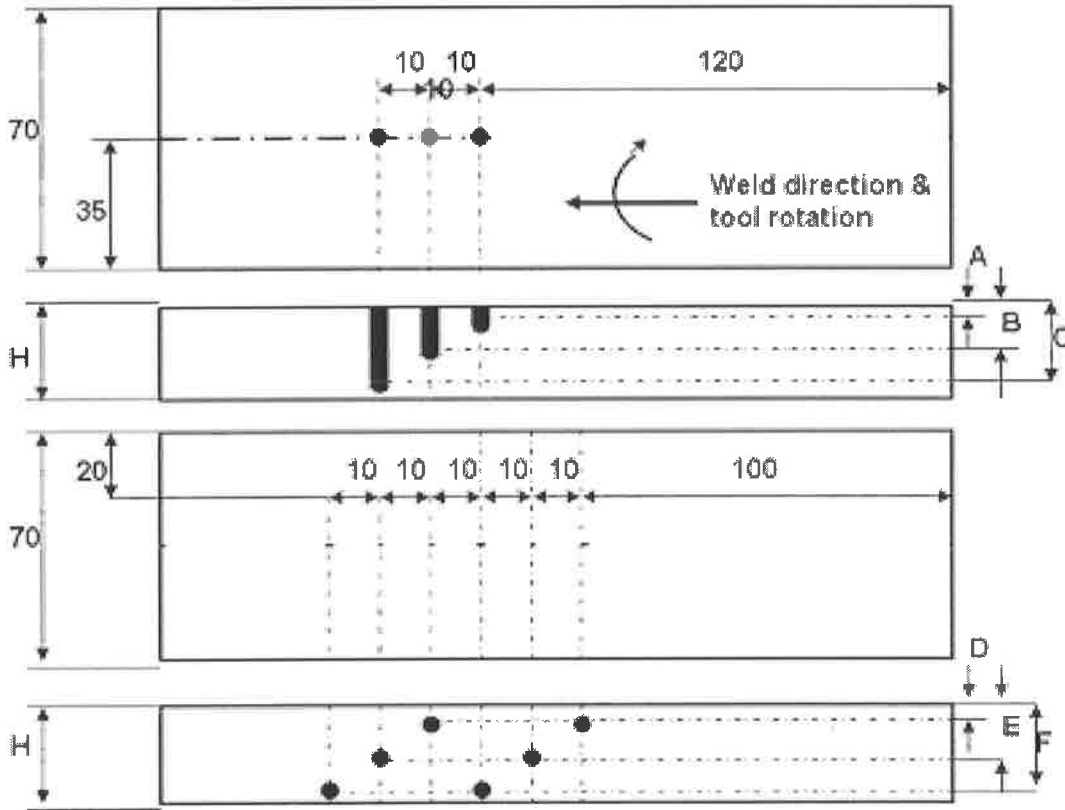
Location and depth of thermocouple holes (A-F) to be read in conjunction with Table 3-6. Note all dimensions are in millimetres. The captions top to bottom are retreating side top view, retreating side interface (join), advancing side top view and advancing side join.
